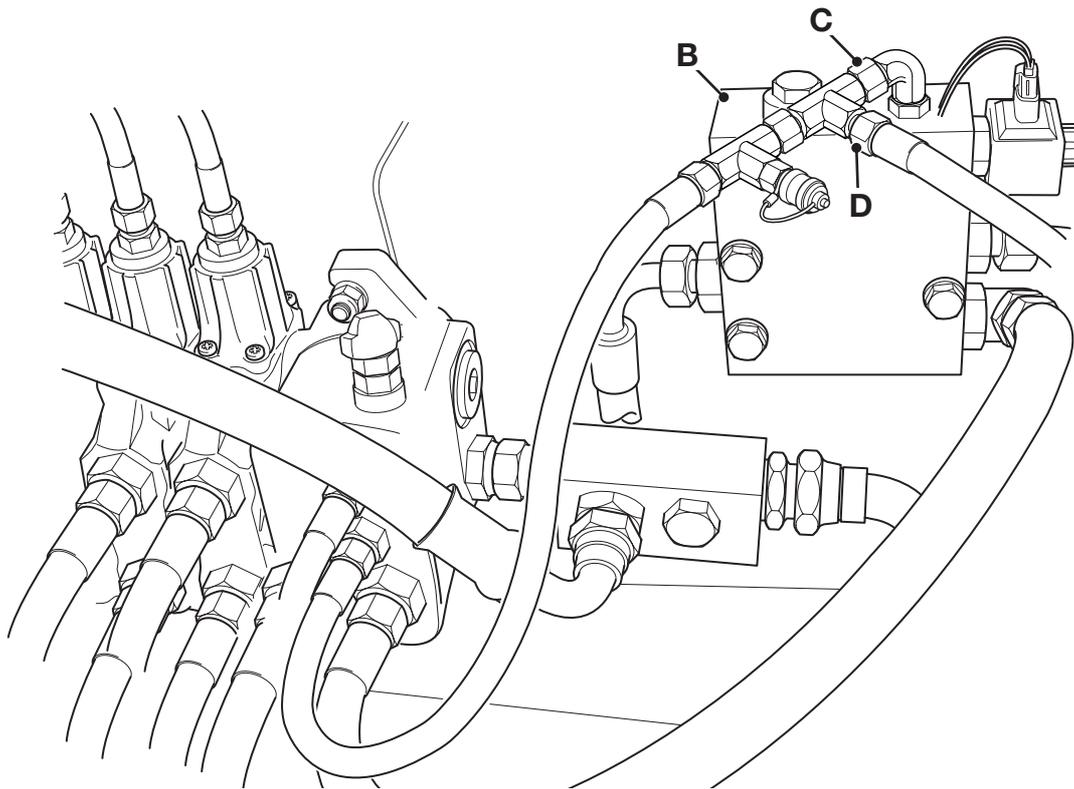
Checking for Internal Leakage Fault in Load Sense Line
